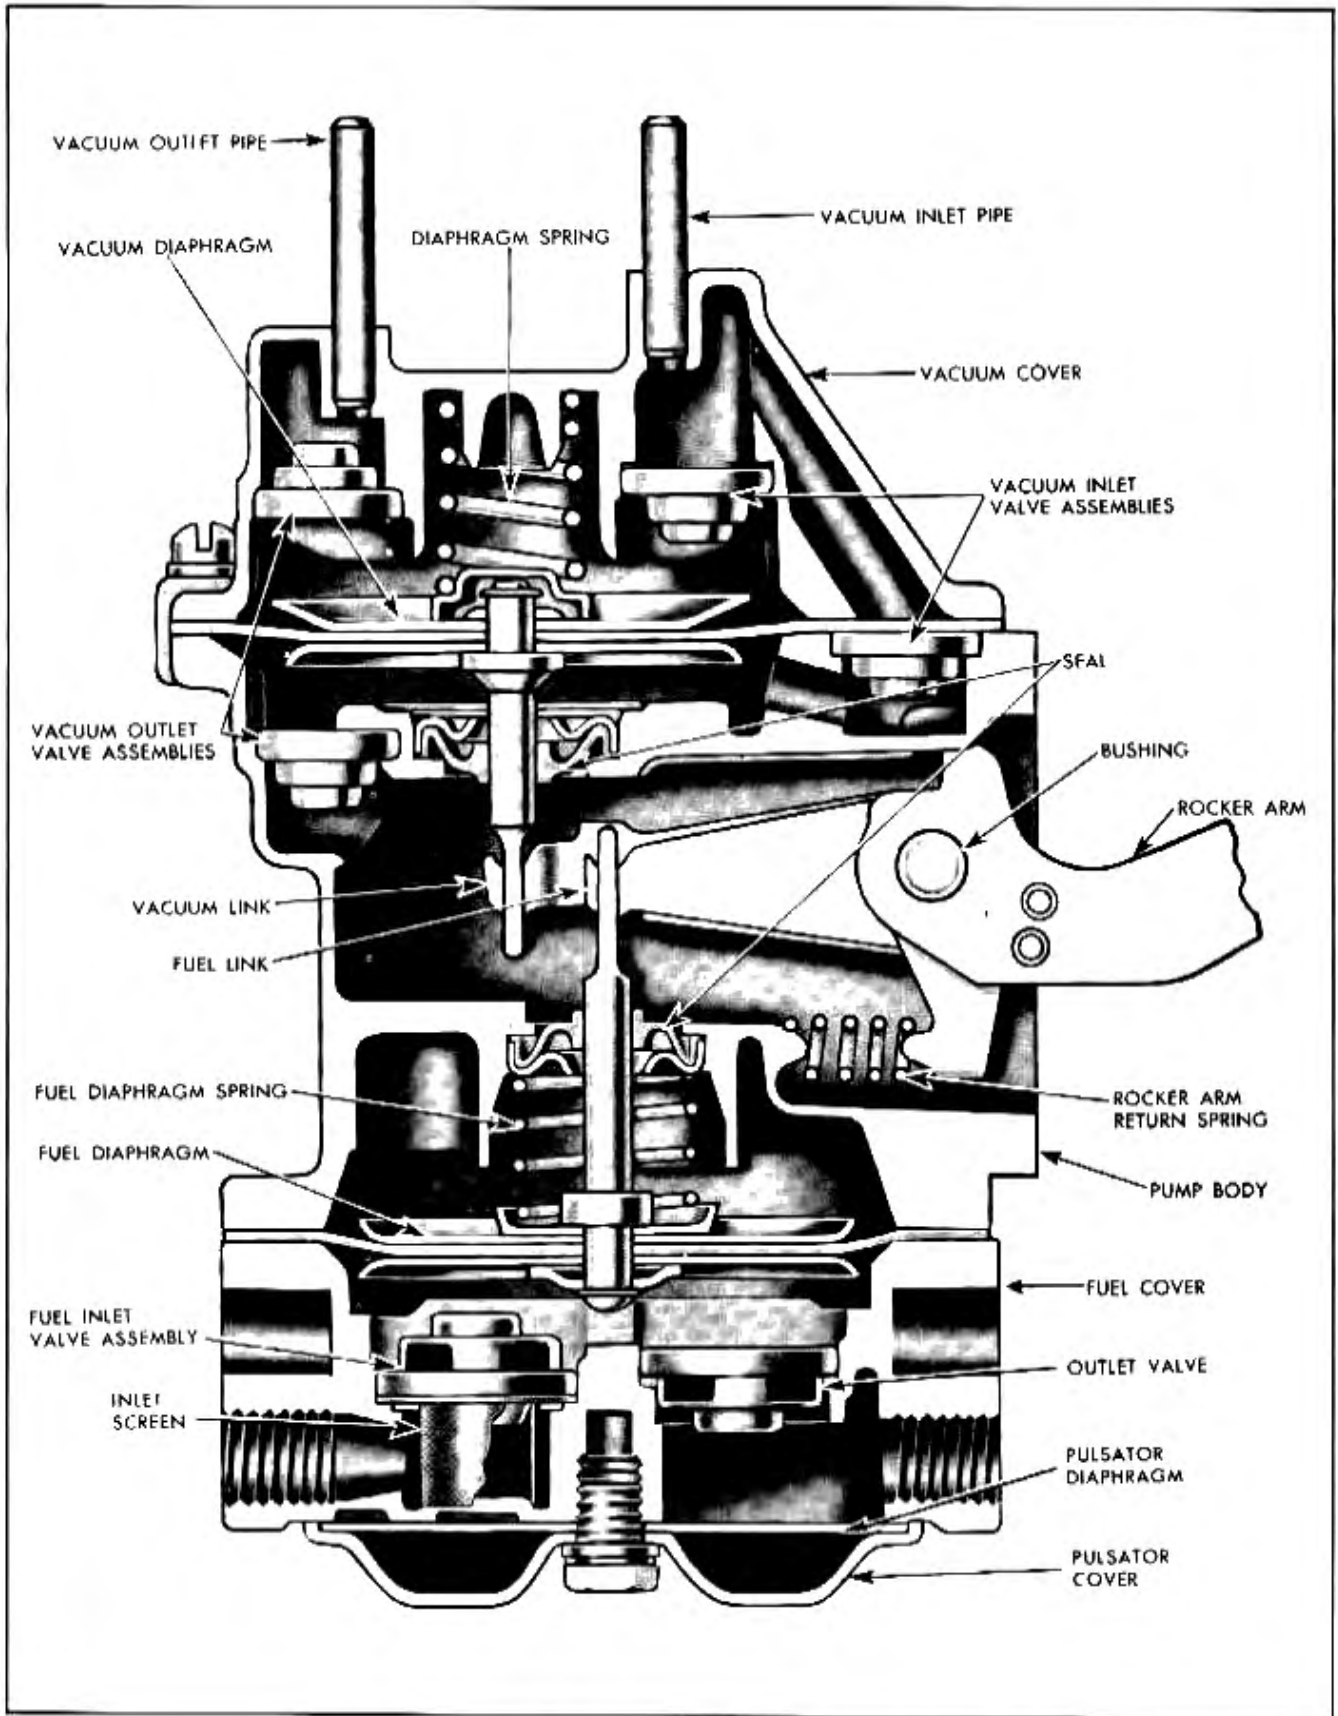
B-99 Schematic View of Combination Fuel and Vacuum Pump
